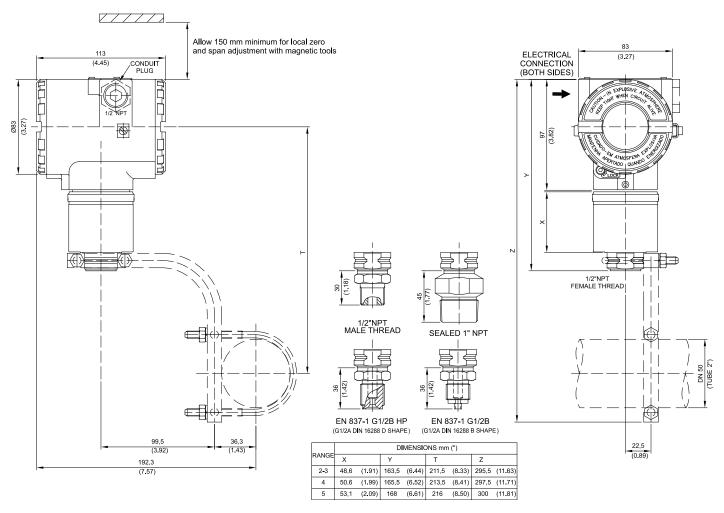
(a) – Dimensional Drawing and Mounting Position for LD290
